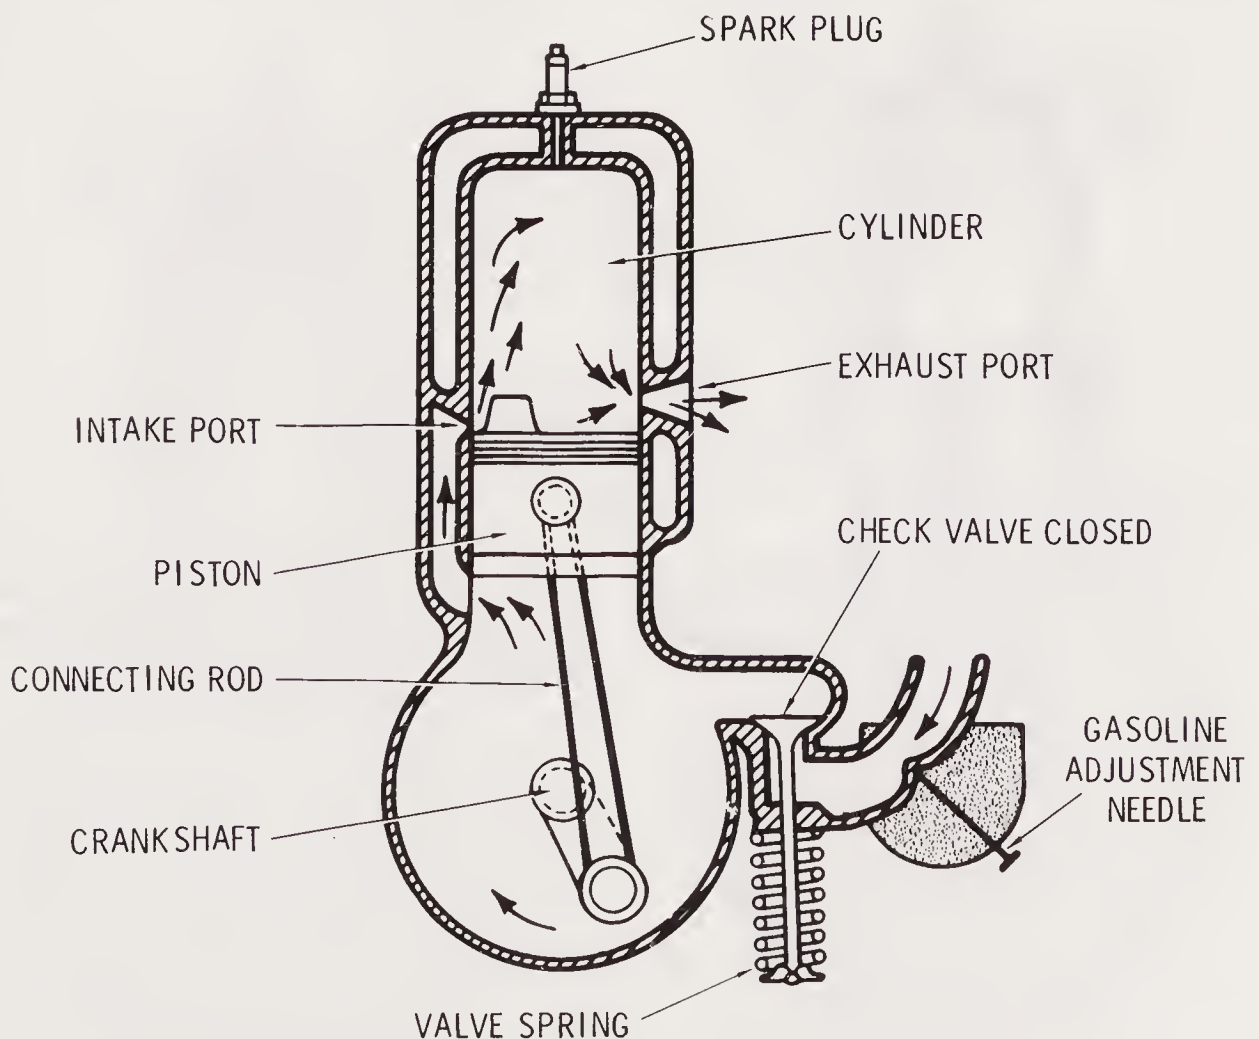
The principal parts of a two-stroke-cycle gas engine.
